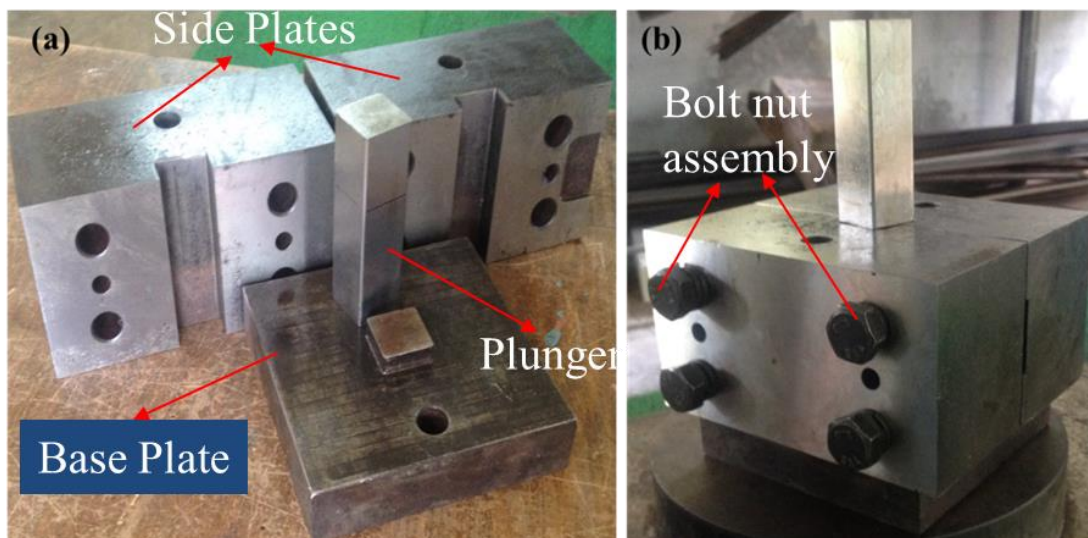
MAF dies after machining (a) Exploded view (b) Assembled view
